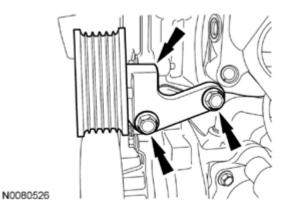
Locating Bolts And Accessory Drive Belt Idler Pulley Bracket Courtesy of FORD MOTOR CO.
